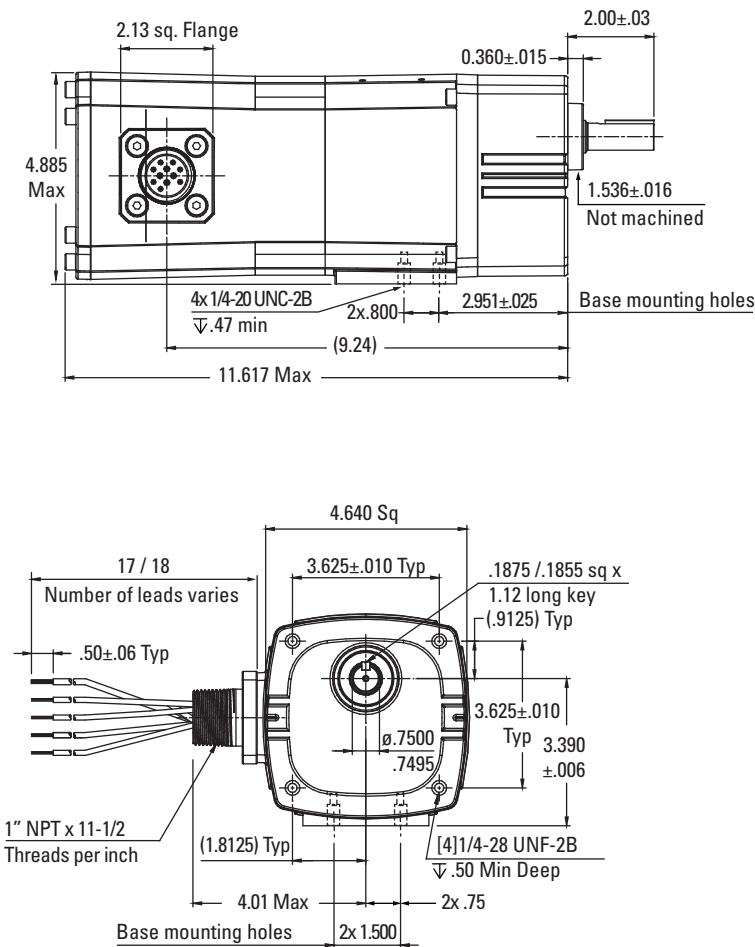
Dimensions for Standard 34R6BXPP Motor
